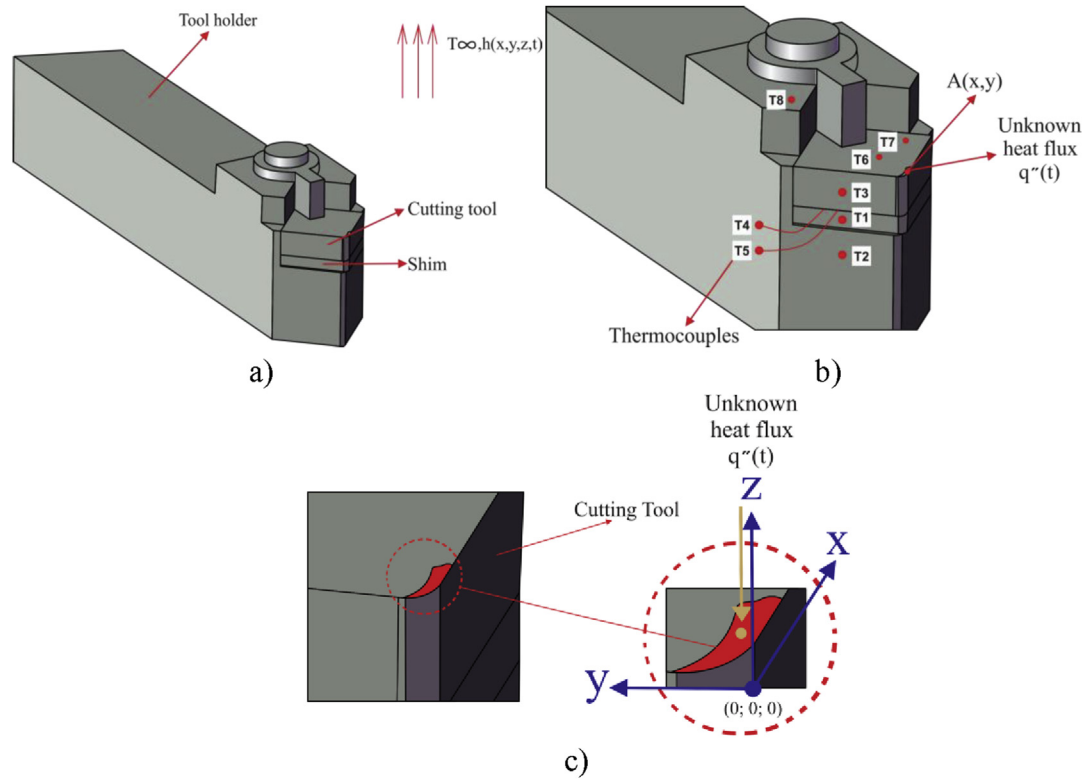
a) Tool and tool holder assembly, b) detail of the positions of the thermocouples welded to the tool and c) a close view of the origin and orientation.
